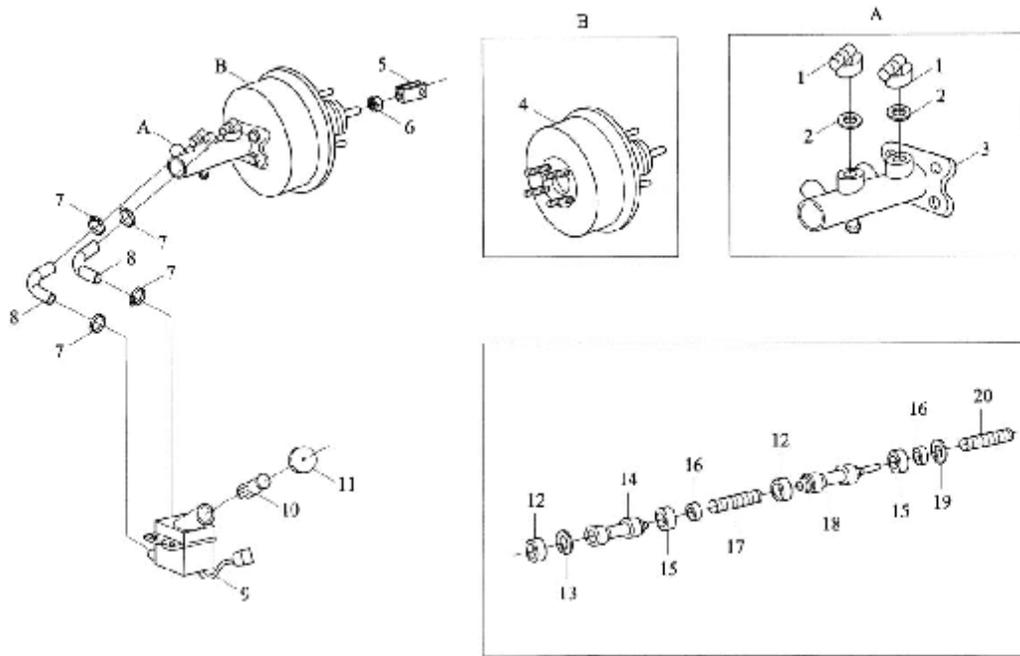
Vacuum Booster with Brake Master Cylinder Assembly
